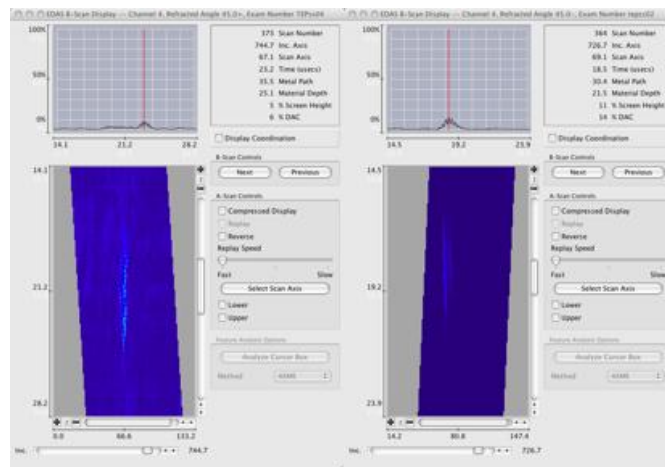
Left - Crack S1 detected from carbon steel side of the weld. Right - Crack S1 detected from stainless steel side of the weld.
